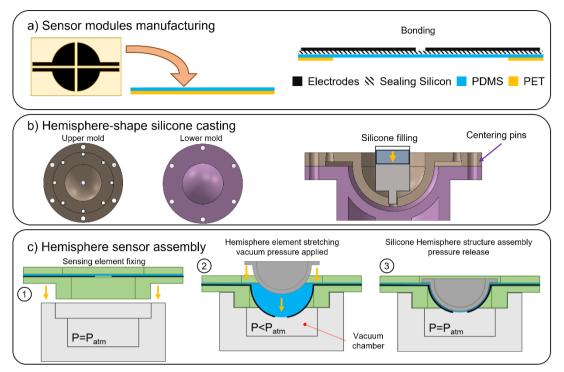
Schematic representation of the main manufacturing and assembly process steps: a) sensing element manufacturing process; b) Hemisphere-shape silicone casting process; c) Hemisphere-shape silicone assembly with sensing element.
